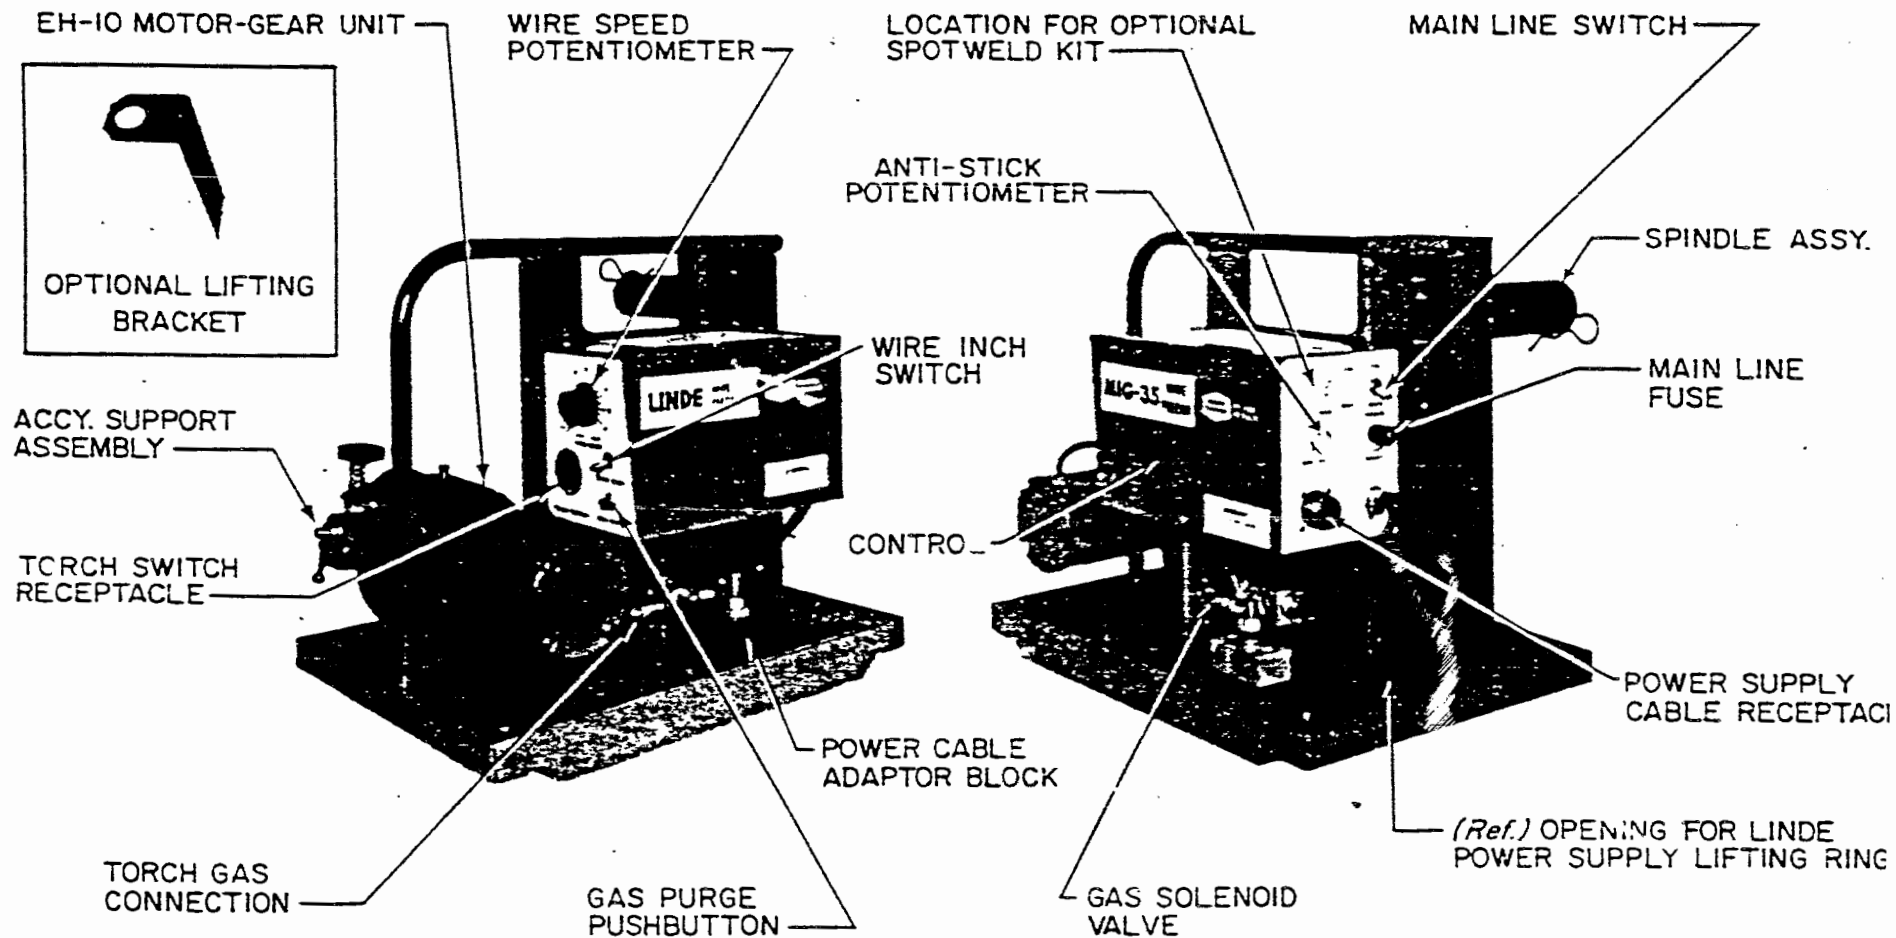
MIG-35 Wire Feeder (front and rear views)
